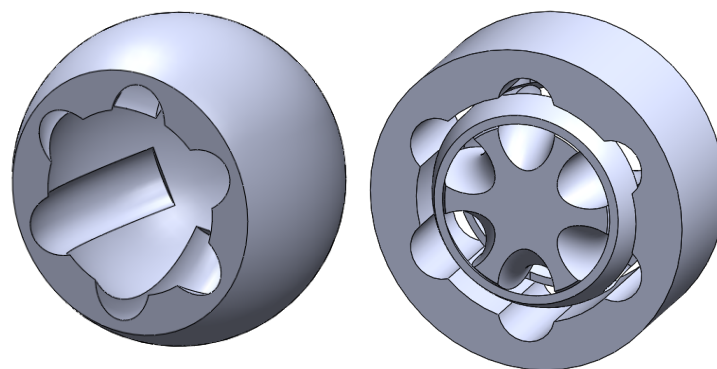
(Left) Rendering of a Rzeppa joint outer race, done in SOLIDWORKS. (Right) Partial assembly view of a Rzeppa joint, done in SOLIDWORKS.
